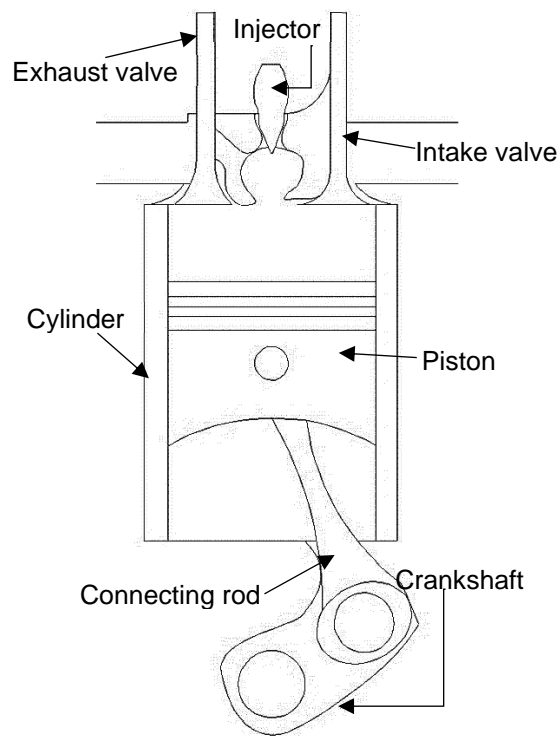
A cross-sectional diagram showcasing the internal components of a reciprocating diesel engine. The diagram displays key elements, including the piston, cylinder, valves, connecting rod, injector, and crankshaft.
